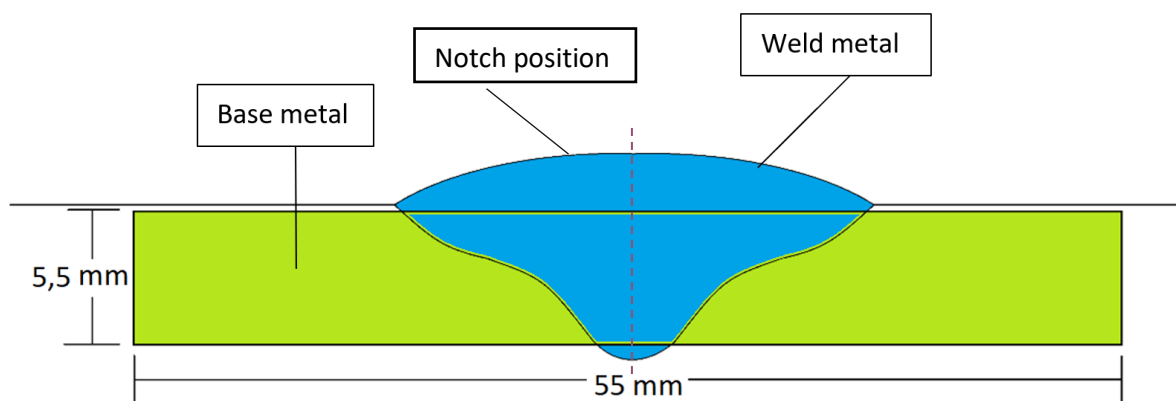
Schematic cross-section of the extraction of Charpy impact test pieces from as-welded samples.
